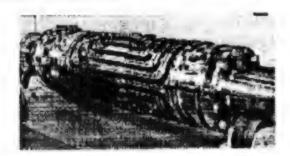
Machined Nickel-Base Superalloy Shaft With Numerically Controlled Machining Technique
